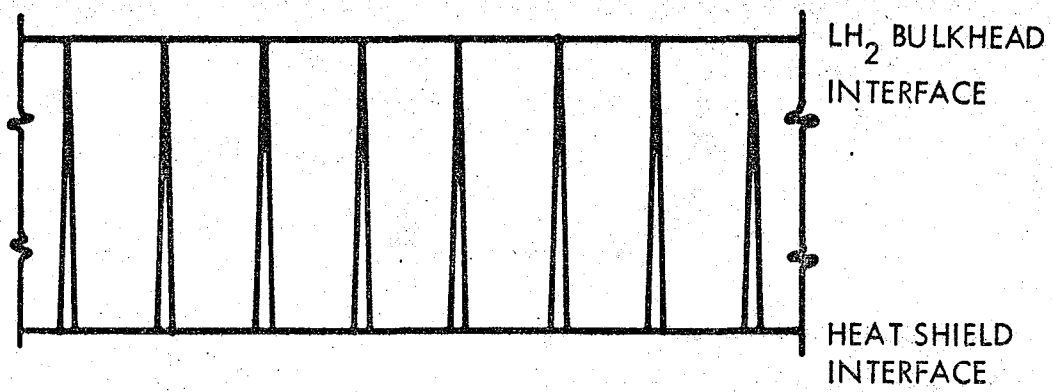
Developed View - Inner Cylindrical Bulkhead
